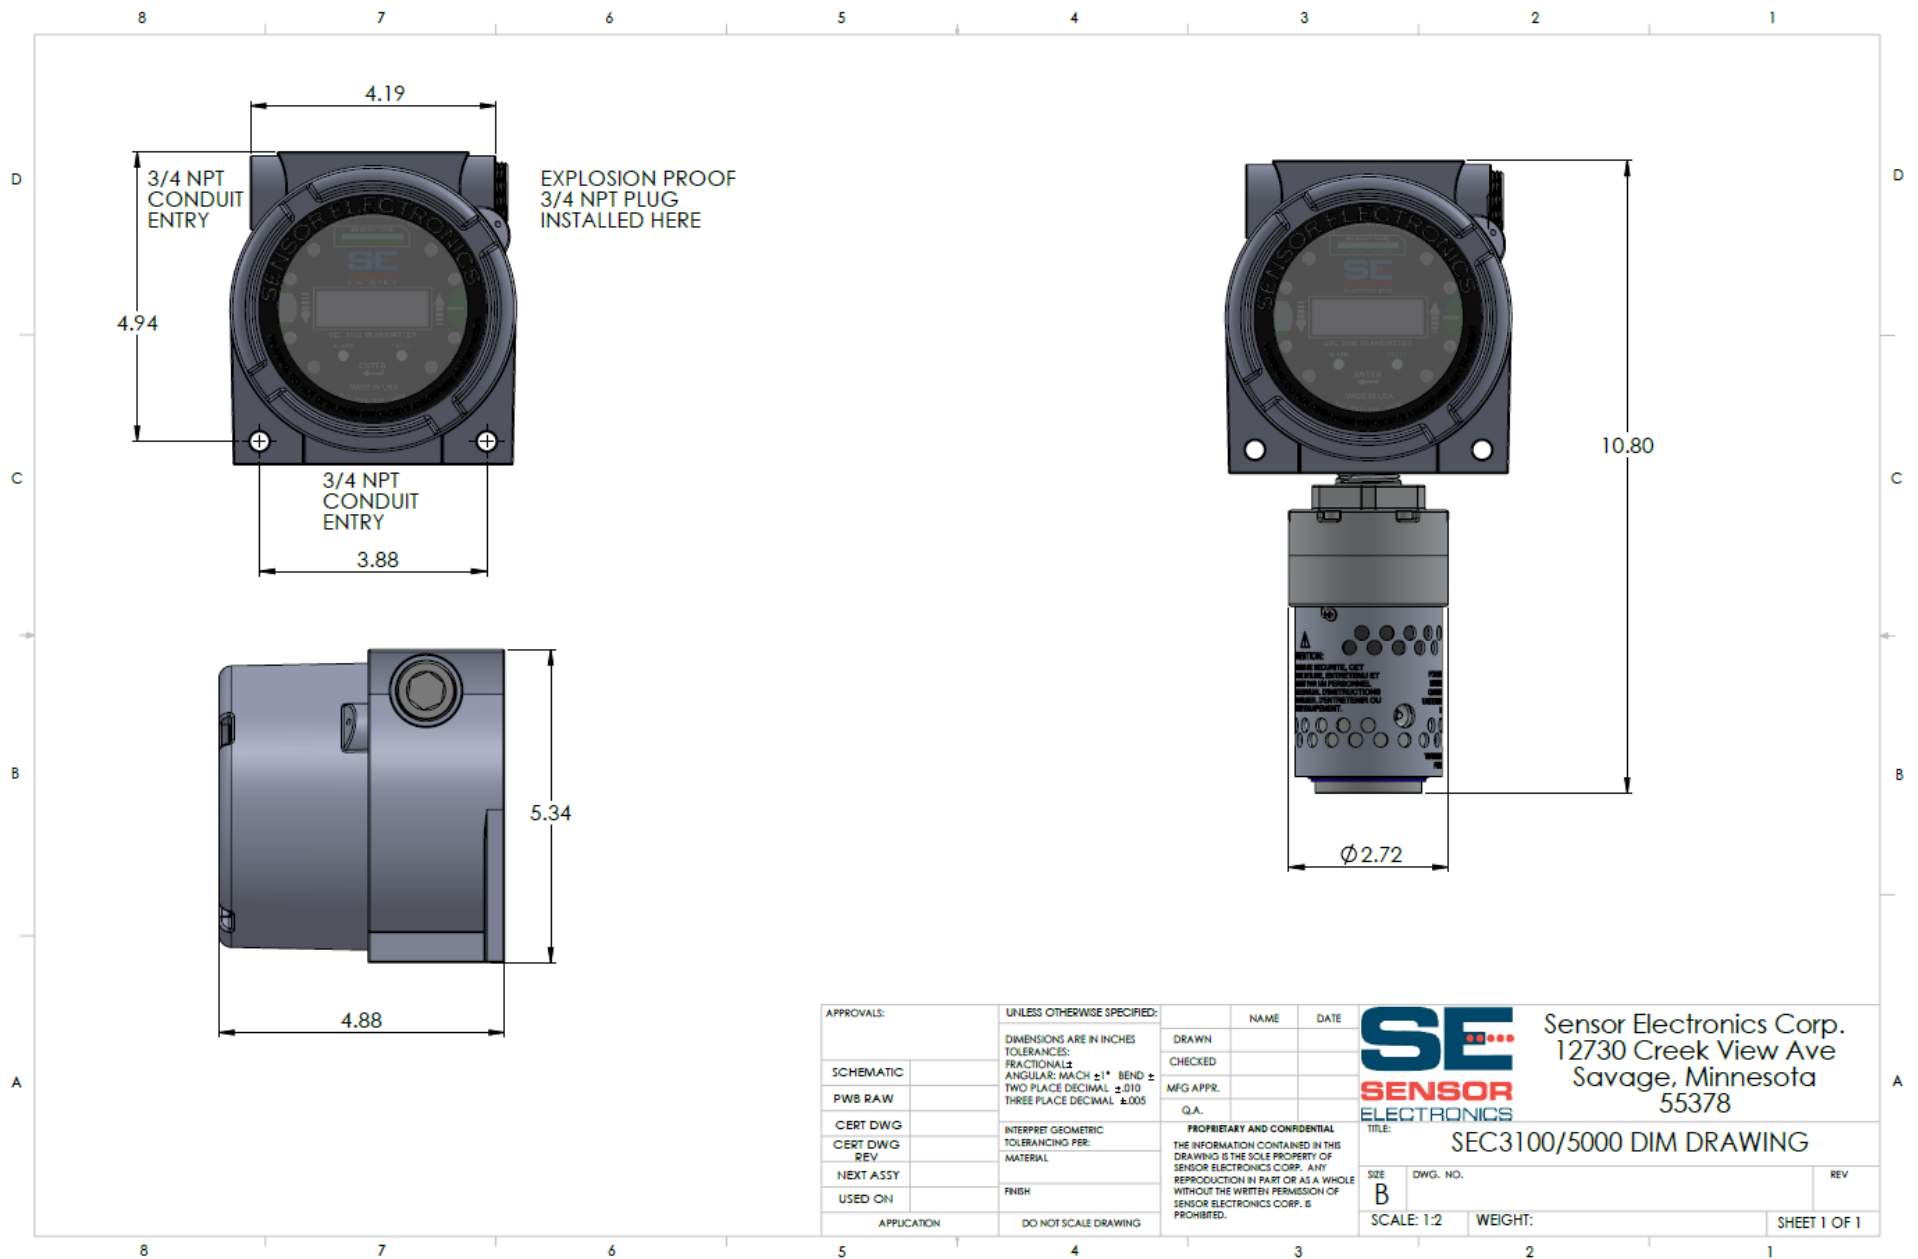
Mounting SEC 3100 and 5000 (Short)
